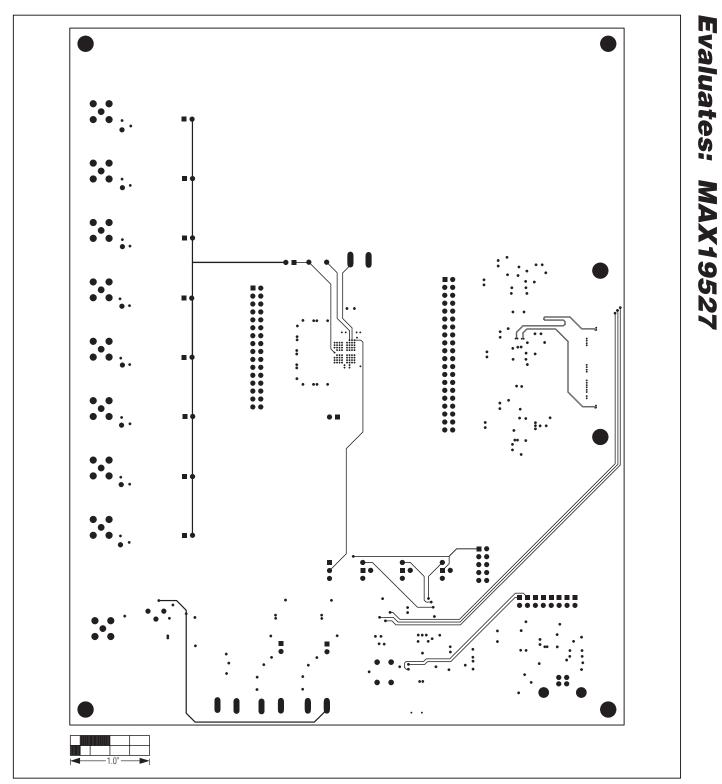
MAX19527 EV Kit PCB Layout (Inner Layer 5)—Routing Plane
